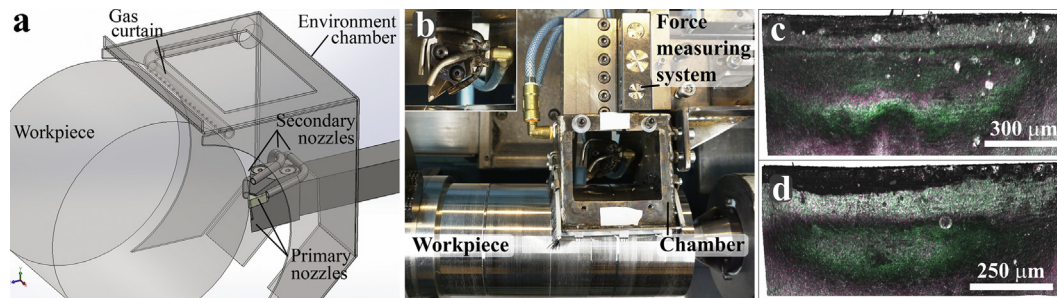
(a) Schematic of the controlled environment chamber; (b) experimental setup when machining Alloy 718; oxide deposit on the flank of cemented carbide tool after 45 s machining (c) on air and (d) in argon.
